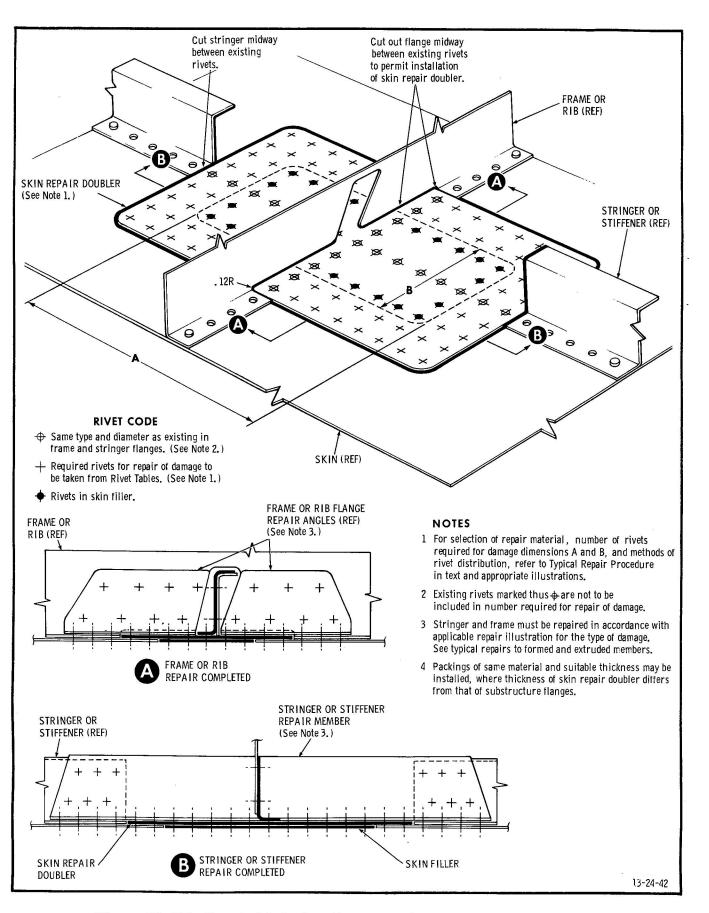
Skin Repair Methods - Damage at Intersection of Substructure
